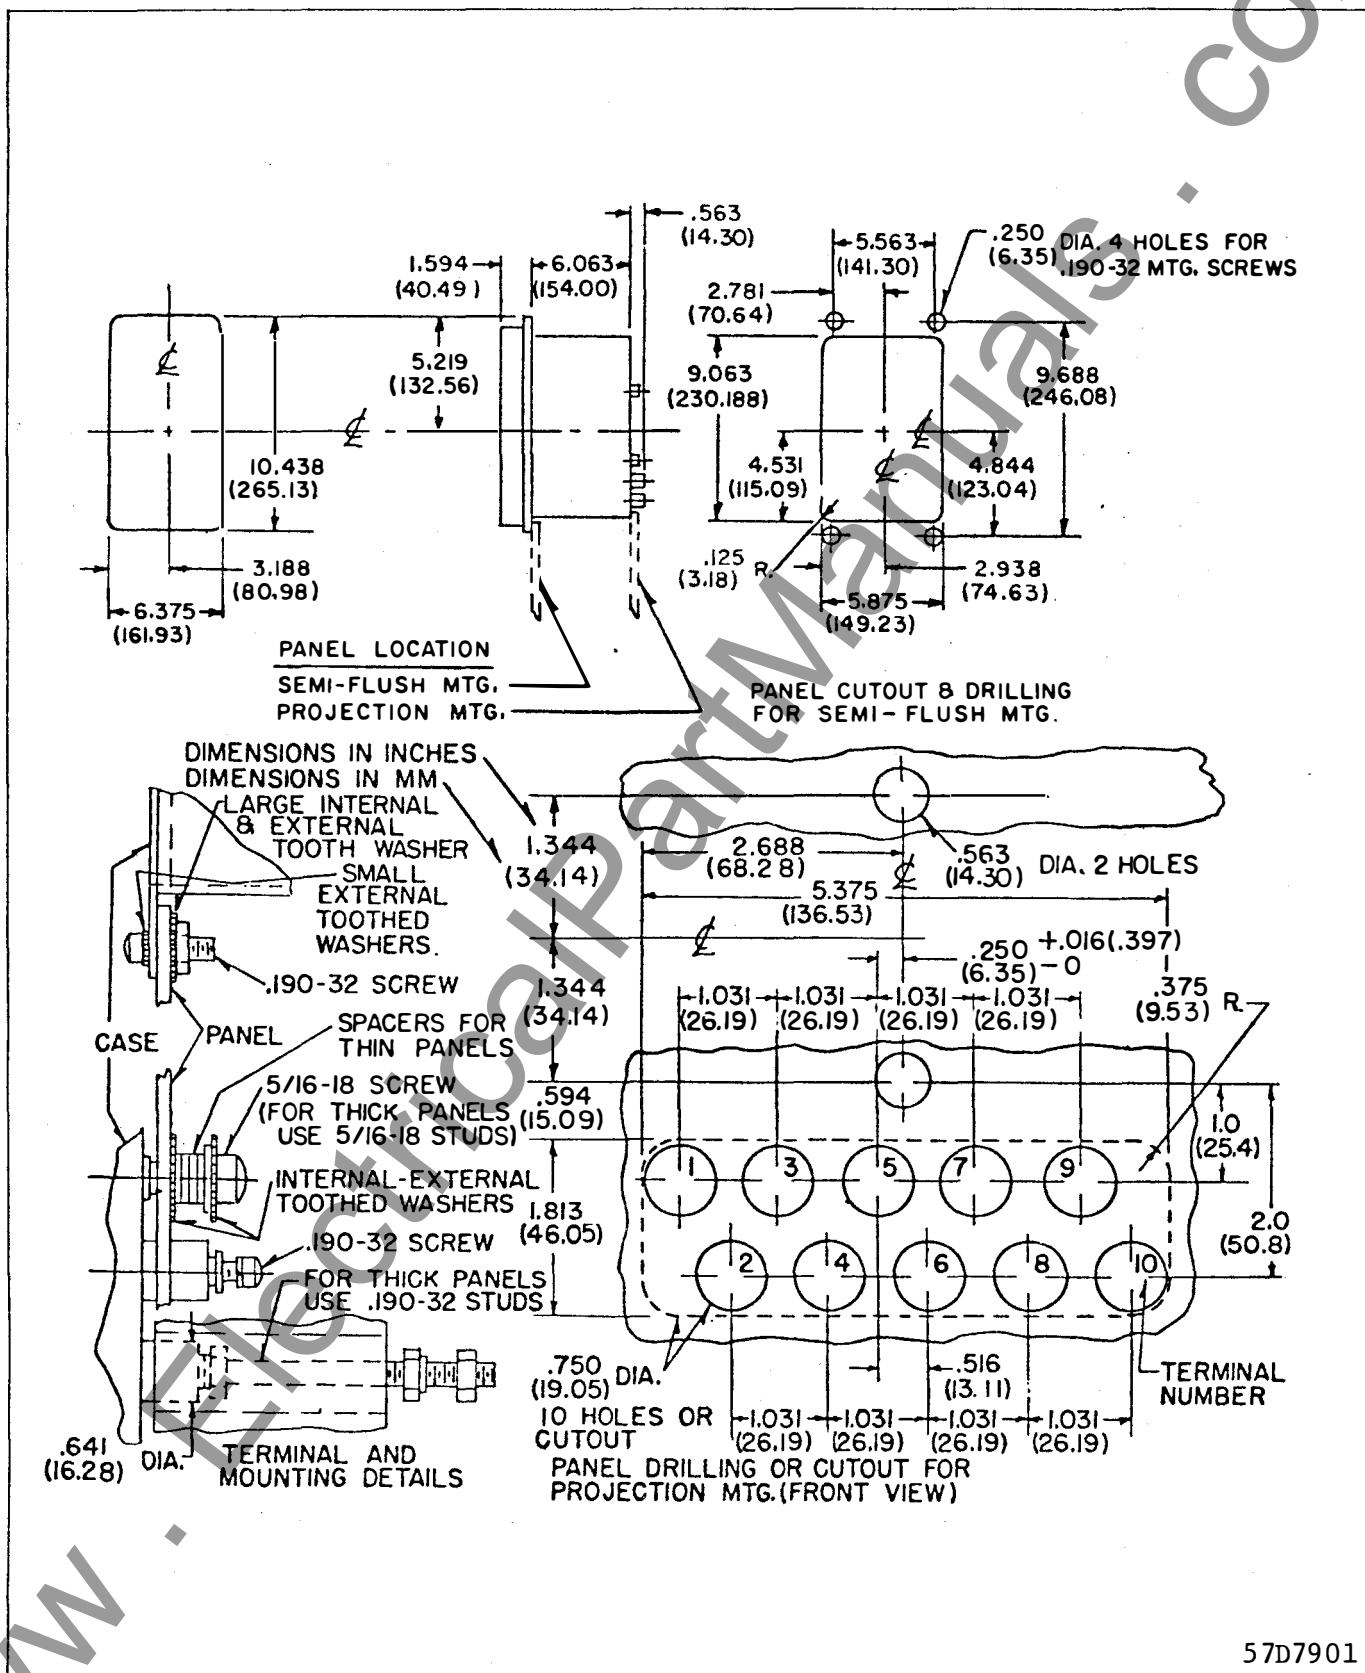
Outline and Drilling Plan for the Type FT21 Case
